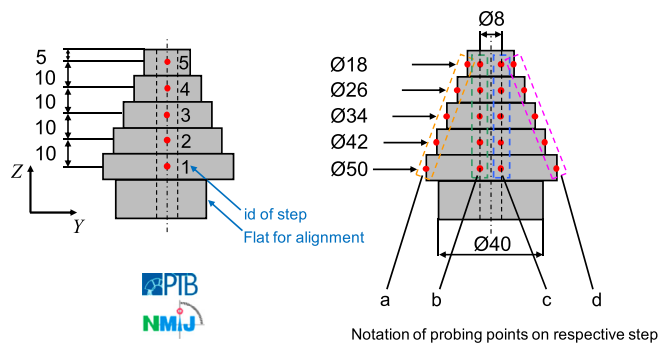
Lengths to be measured on step cylinder (simplified sketch taken from [4]; dimensions in mm).
